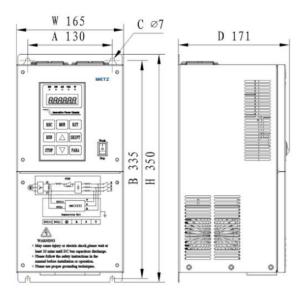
C1 wall-mounted chassis dimensions and installation dimensions
